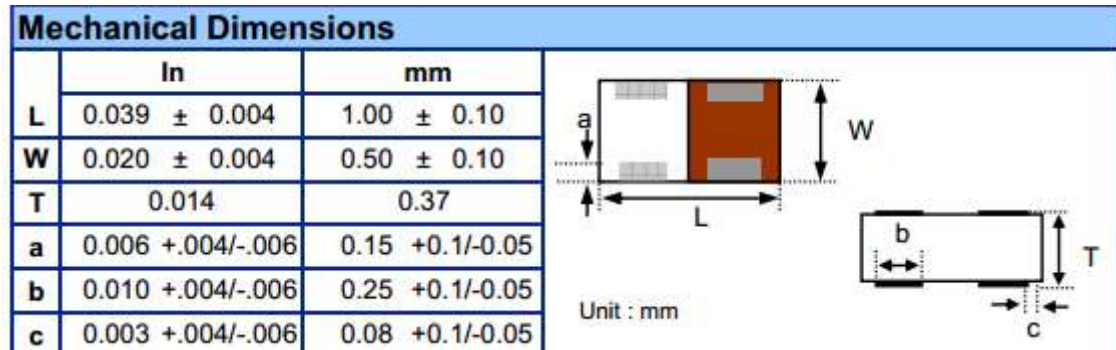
Ceramic antenna: PCB footprint and mechanical specifications
